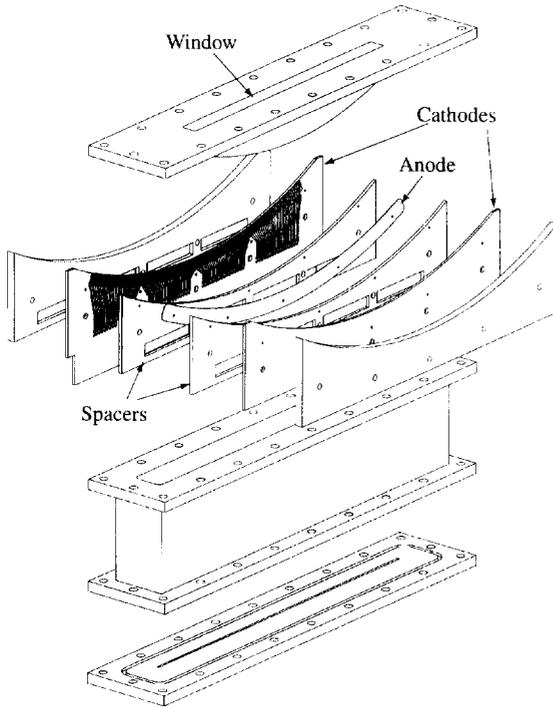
An exploded view of a 1D curved blade detector assembly. Not shown in this diagram are additional electrodes to enhance the electron drift.
